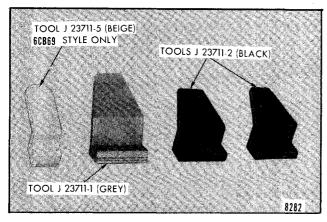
Glass Alignment Gage Blocks - Tool J-23711 or Equivalent (Set of Four Blocks) - E Styles
